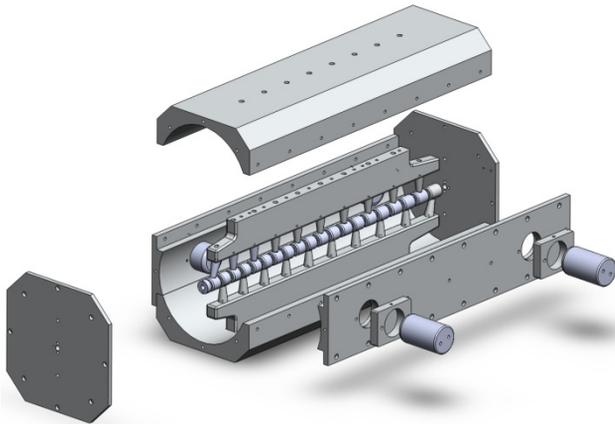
An exploded view of the tank IH1m cold model. Two pairs of slug tuners are located on the side panels.
